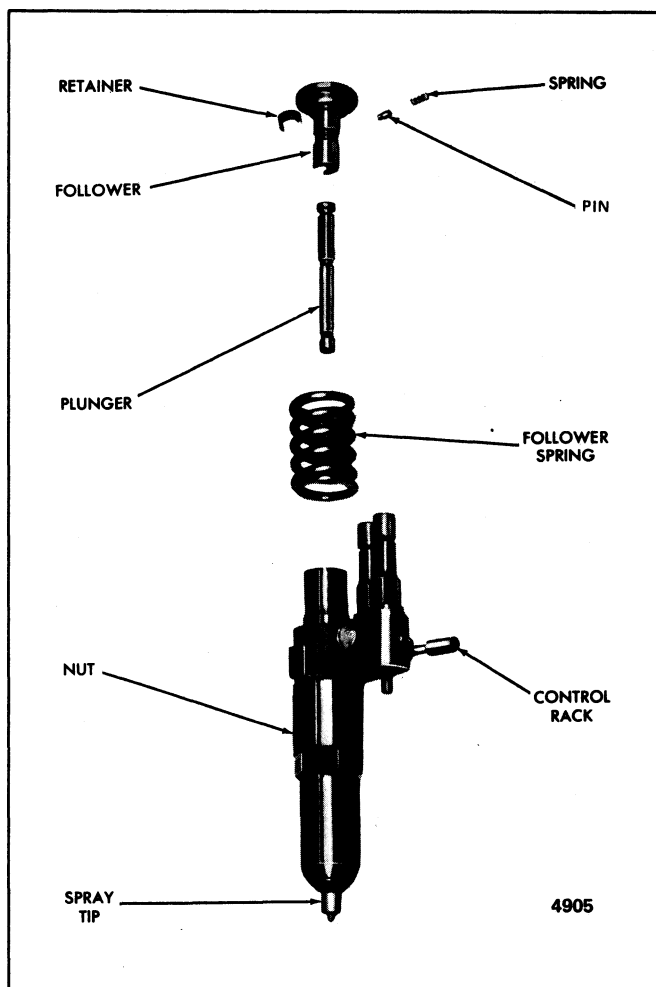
Injector Plunger, Follower and Relative Location of Parts
